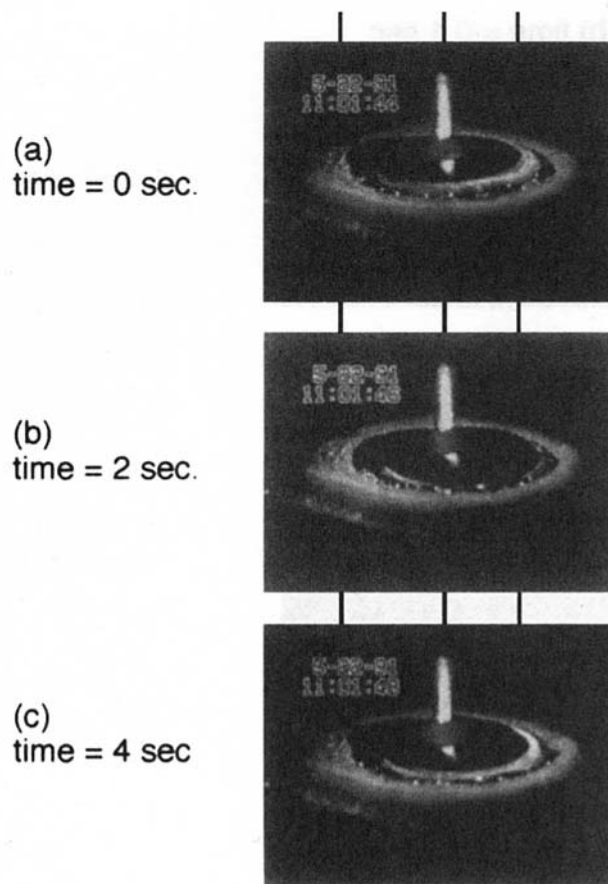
Weld pool oscillation during steel welding (200 A, 14.0 V, 4 mm arc length, 20 deg electrode tip angle); the weld pool oscillates from left (a) to right (b) and back to left (c)
